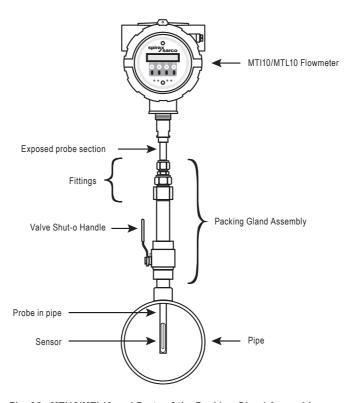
MTI10/MTL10 and Parts of the Packing Gland Assembly
